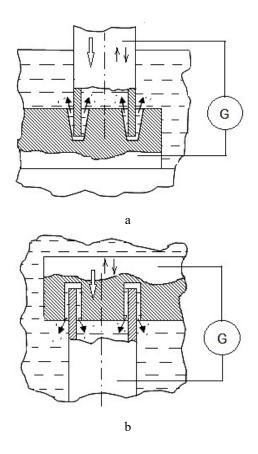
Machining schemes applied to obtain cylindrical test pieces from a plate type workpiece on a ram electrical discharge machining: *a* – vertical work movement from up to down achieved by tool electrode; *b* – vertical work movement from up to down achieved by the workpiece [6].
